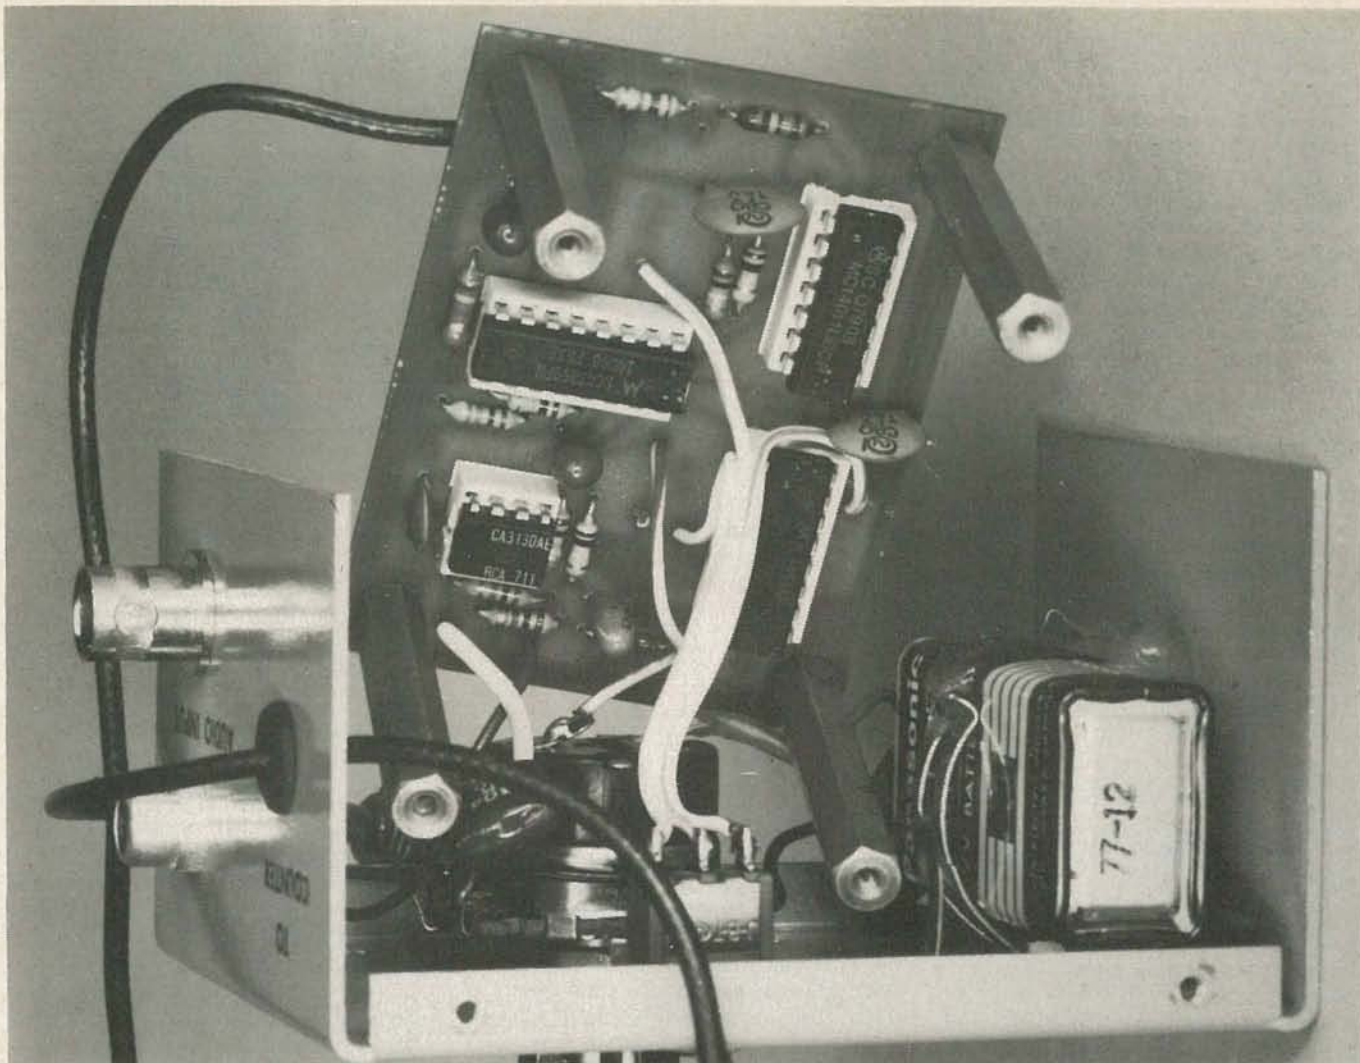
1½-INCH threaded spacers are used to attach PC board to top of case.
